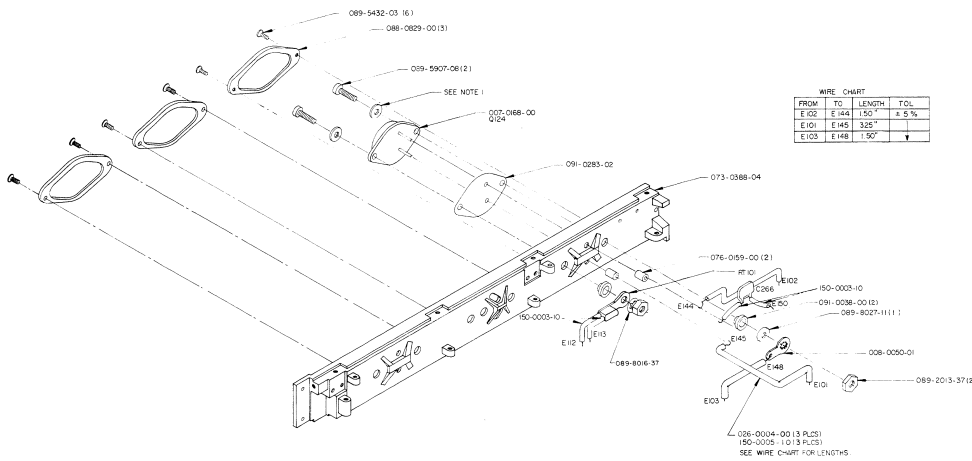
A KY 97A (14V) Modulator Assembly
